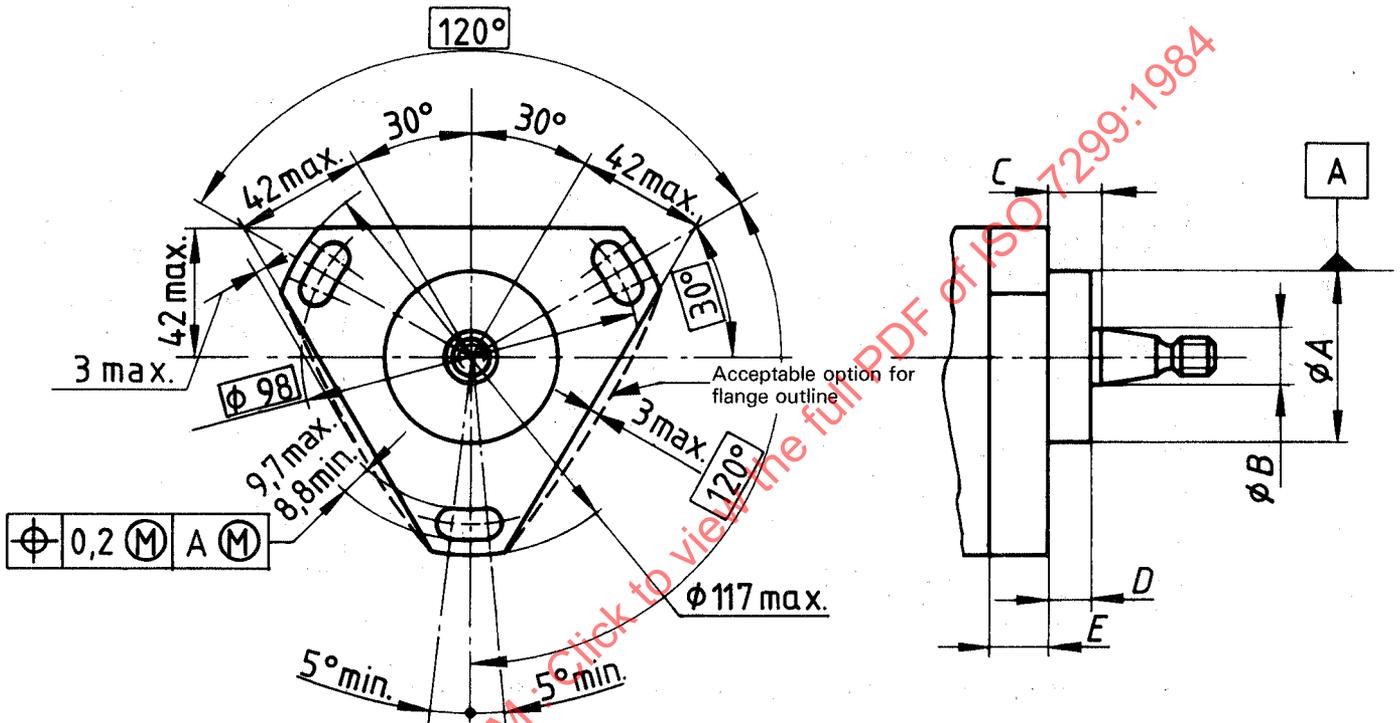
Rotary and distributor fuel injection pumps — Type 2 end-mounting flange
